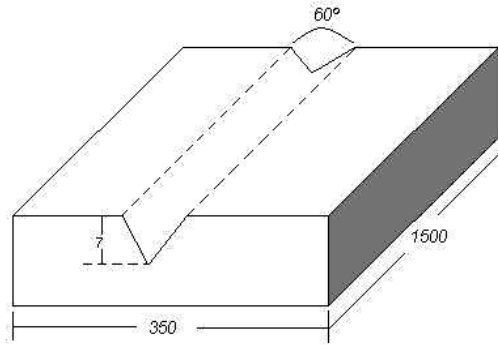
Design of welding specimens (All dimensions in mm).
